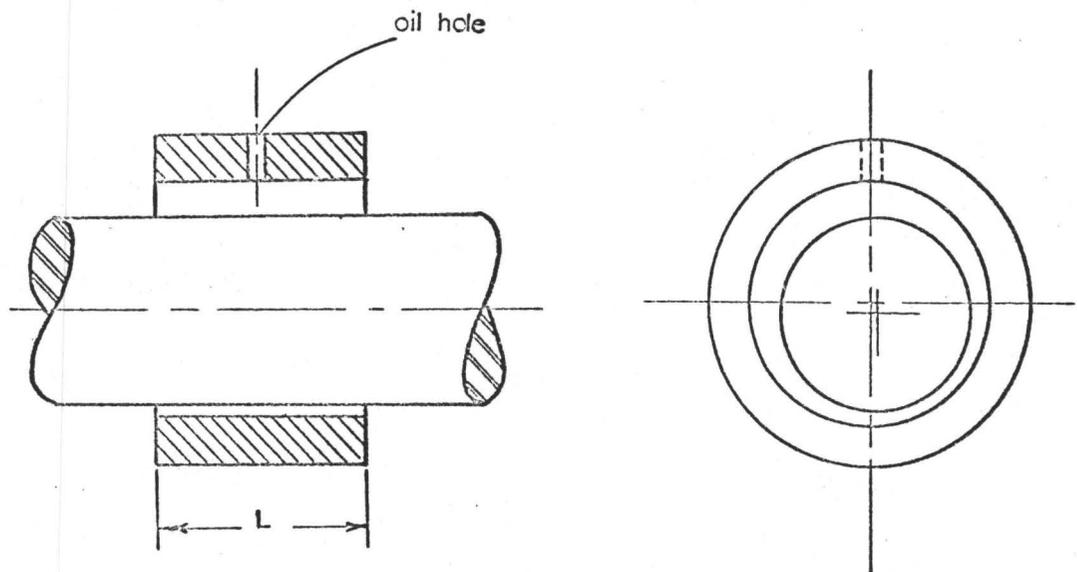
10 Full_cylindrical journal bearing with a single oil hole
